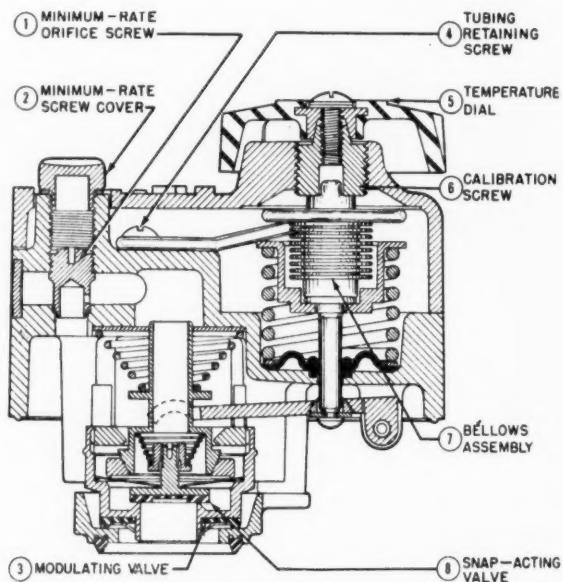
The control manifold is designed so that the automatic valve can be added to the heating unit merely by removing the plate and placing the thermostatic valve in the proper location on the manifold.
